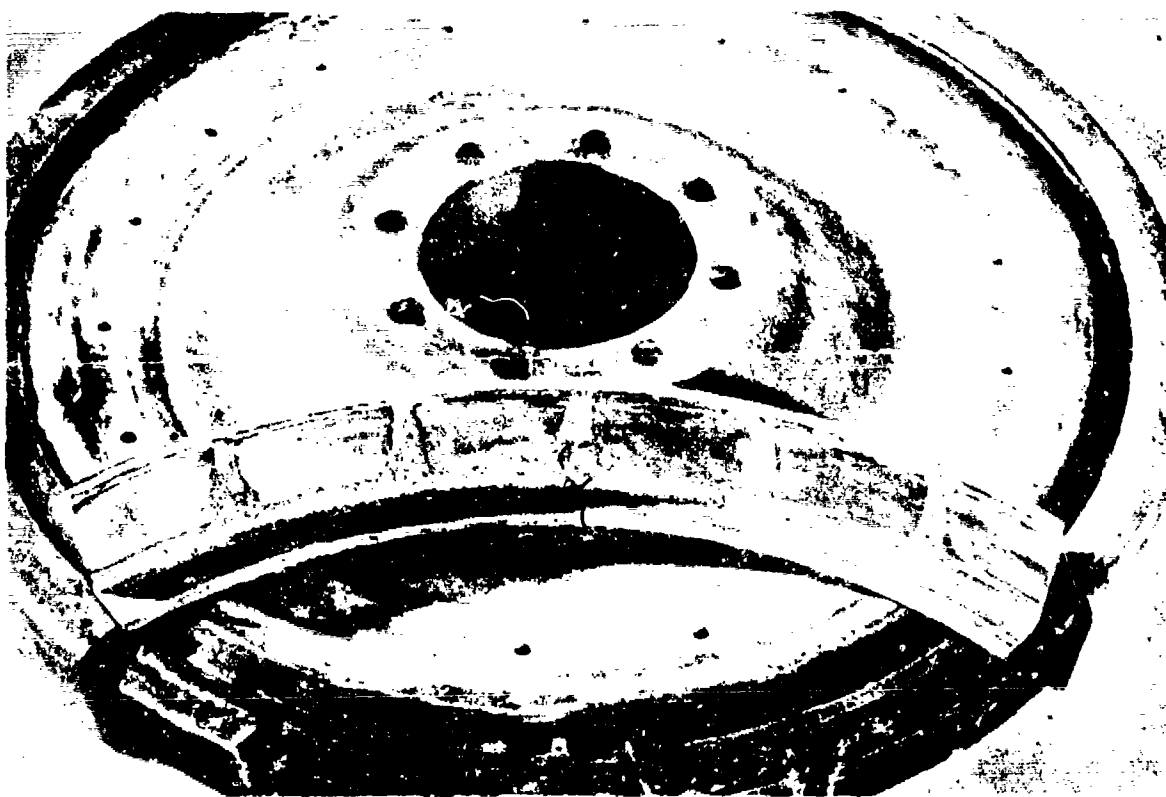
Wheel #2 on Which Shroud Was Cracked but Still Not Broken After 998 Miles. Section Was Sawed From Shroud to Study Crack.
